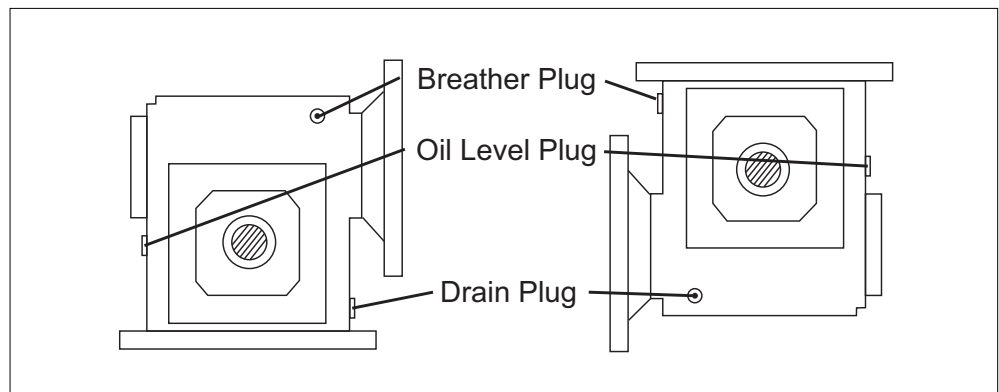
GEAR BOX SCHEMATIC (TYPICAL)
